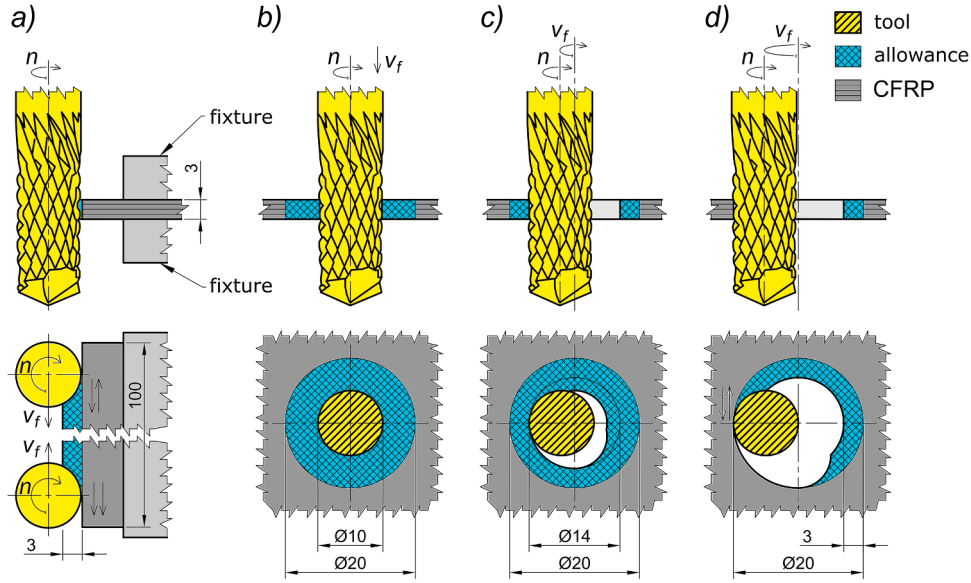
A schematic illustration of the machining experiments in polymer composites reinforced by chopped carbon fibre tows: a) edge trimming using up and down milling technology, b) pilot hole drilling, c) hole-enlargement to provide uniform cutting width ($a_e=3$ mm) for the circular-milling experiments, d) circular-milling experiments using up-milling technology, where v_f denotes the feed rate and n is the spindle speed.
